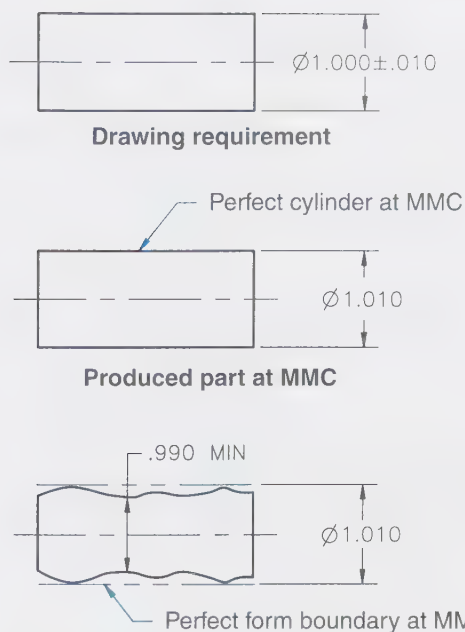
The maximum amount of material exists in the part when a dimension is at maximum material condition.
